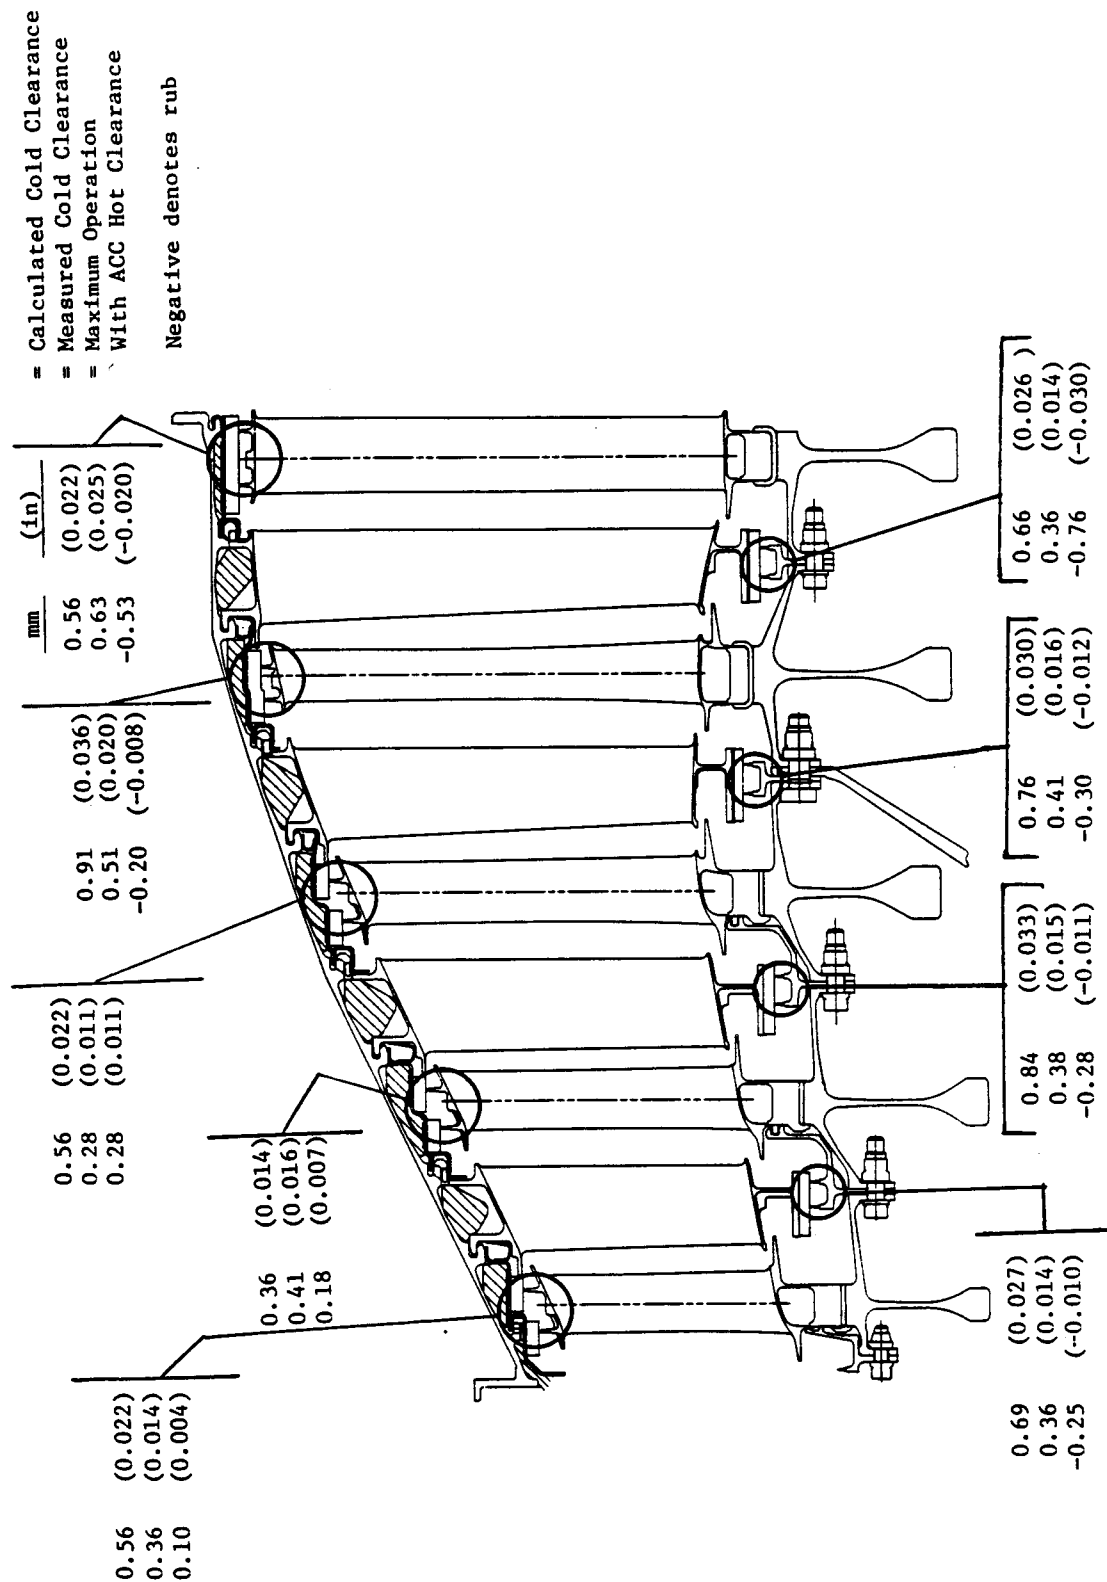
Low Pressure Turbine Blade Tip and Inner Stage Seal Clearances.
